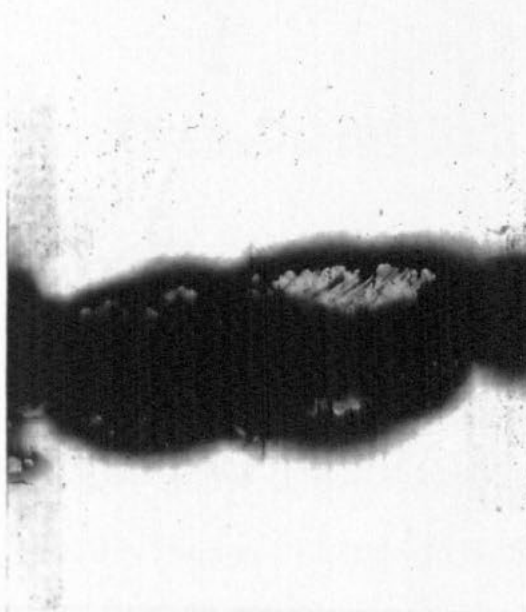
X-Ray of Compressive Fracture for 7.85J
